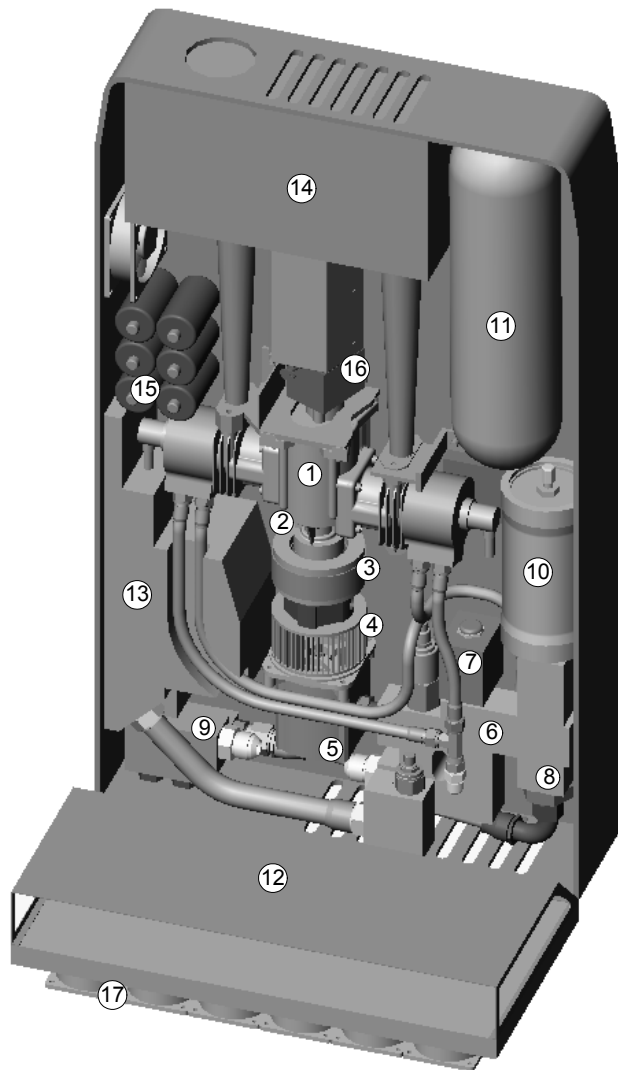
HEPU physical layout. Engine (1); shaft (2, not visible); alternator (3); cooling fan (4); gear pump (5); manifold (6); solenoid valve (7); filter (8, not visible); pressure transducer (9, not visible); accumulator (10); nitrogen tank (11); heat exchanger (12); hydraulic reservoir (13); muffler (14); batteries (15); carburetor and throttle (16); heat exchanger fans (17). Internal baffling around engine is not shown for clarity.
